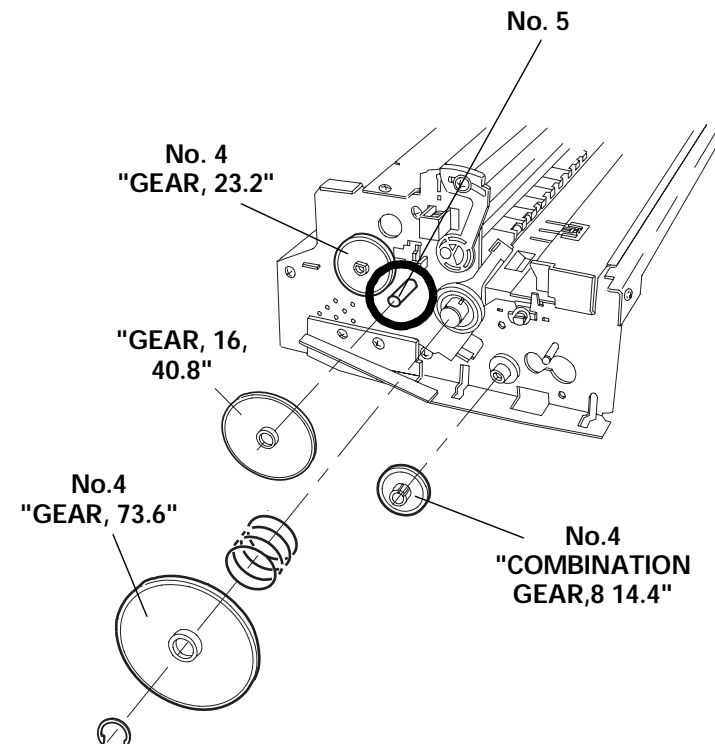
#4 Combination Gears and #5 Gear Shaft
